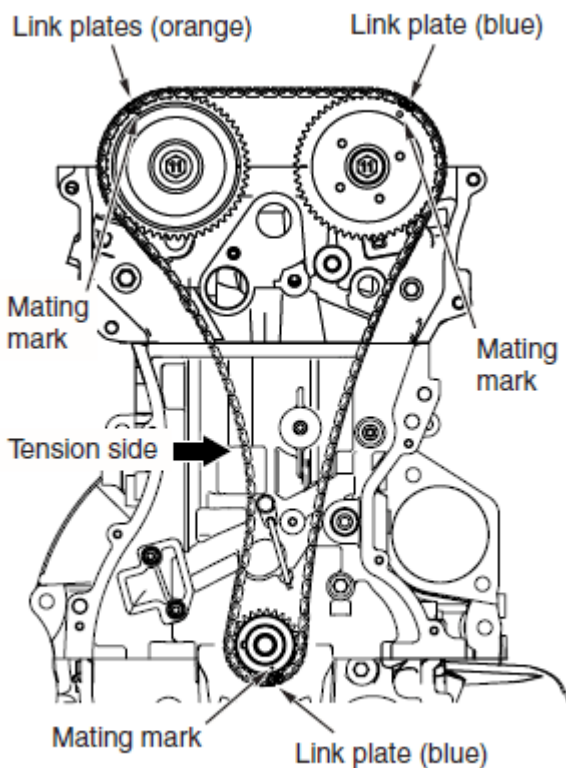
Identifying Camshaft Sprockets Timing Marks And Crankshaft Sprocket Timing Mark
